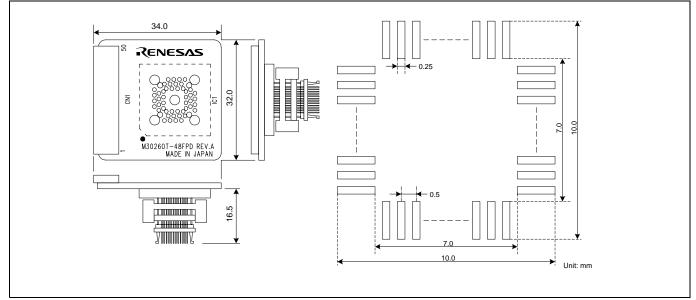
External dimensions and a sample foot pattern of the converter board M30260T-48FPD
